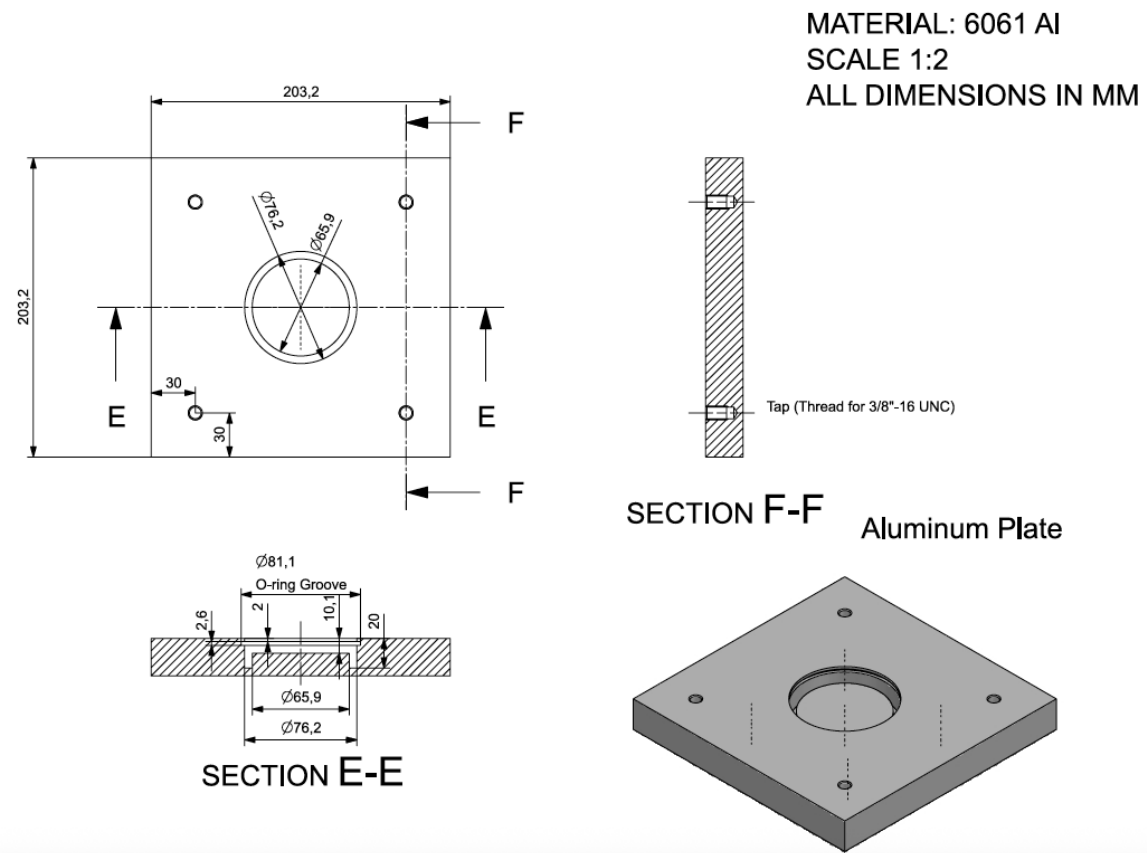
Aluminum plate drawing with the tap. One plate can have only hole for the long black bolt.
